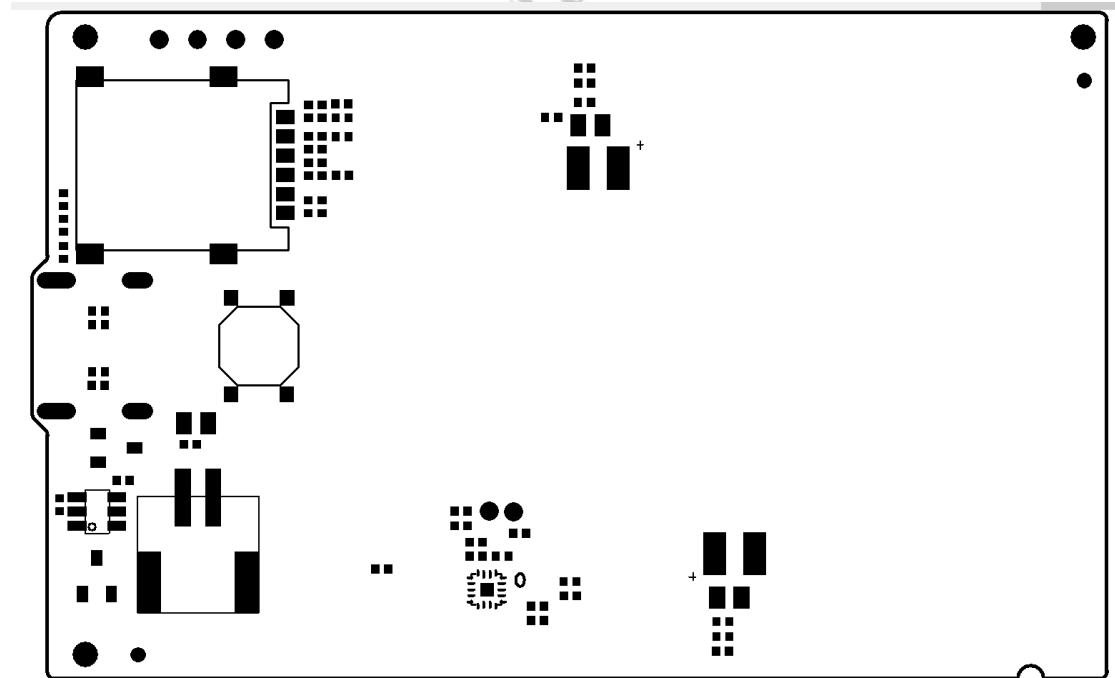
5G S-Module All-in-one Type-L Pin Layout BOT view
